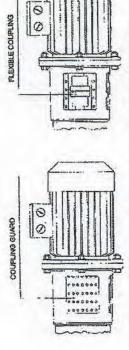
CHECKING THE ALIGNMENT ON MONOBLOCK DESIGN
